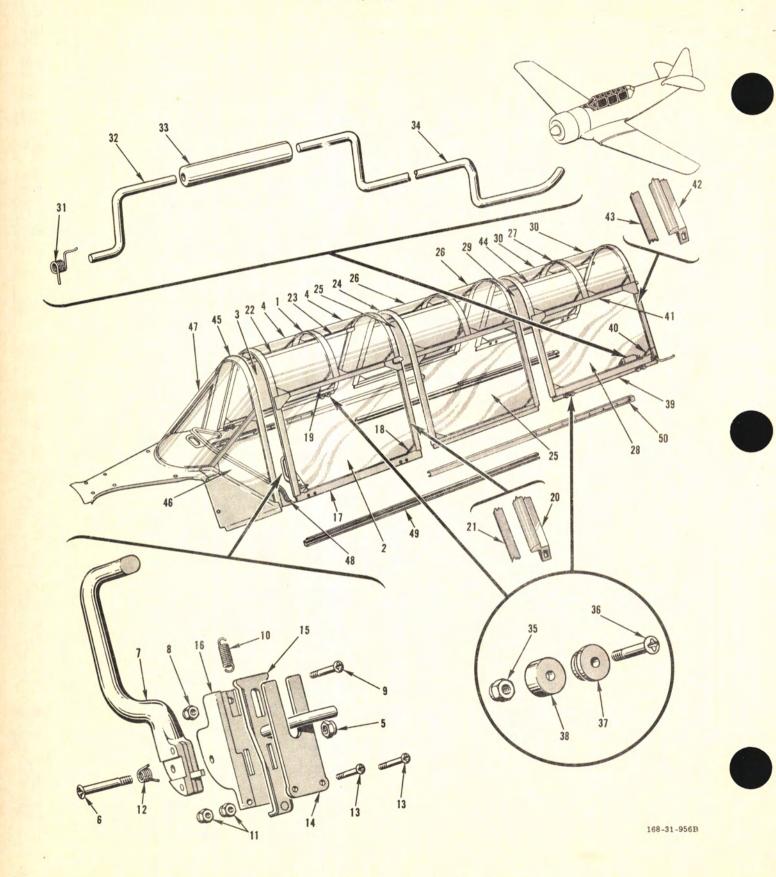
COCKPIT ENCLOSURE AND WINDSHIELD ASSEMBLY
